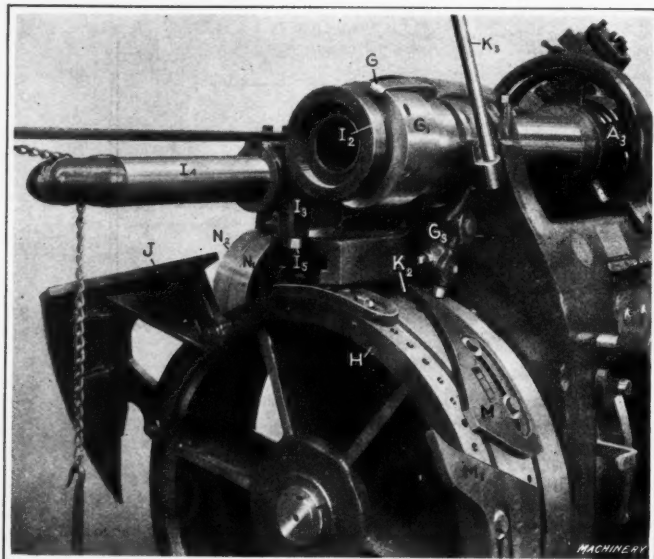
Front End View of Gridley Single-spindle Automatic Turret Lathe, showing Stock-pusher Operating Cam out of Engagement with Operating Roll
